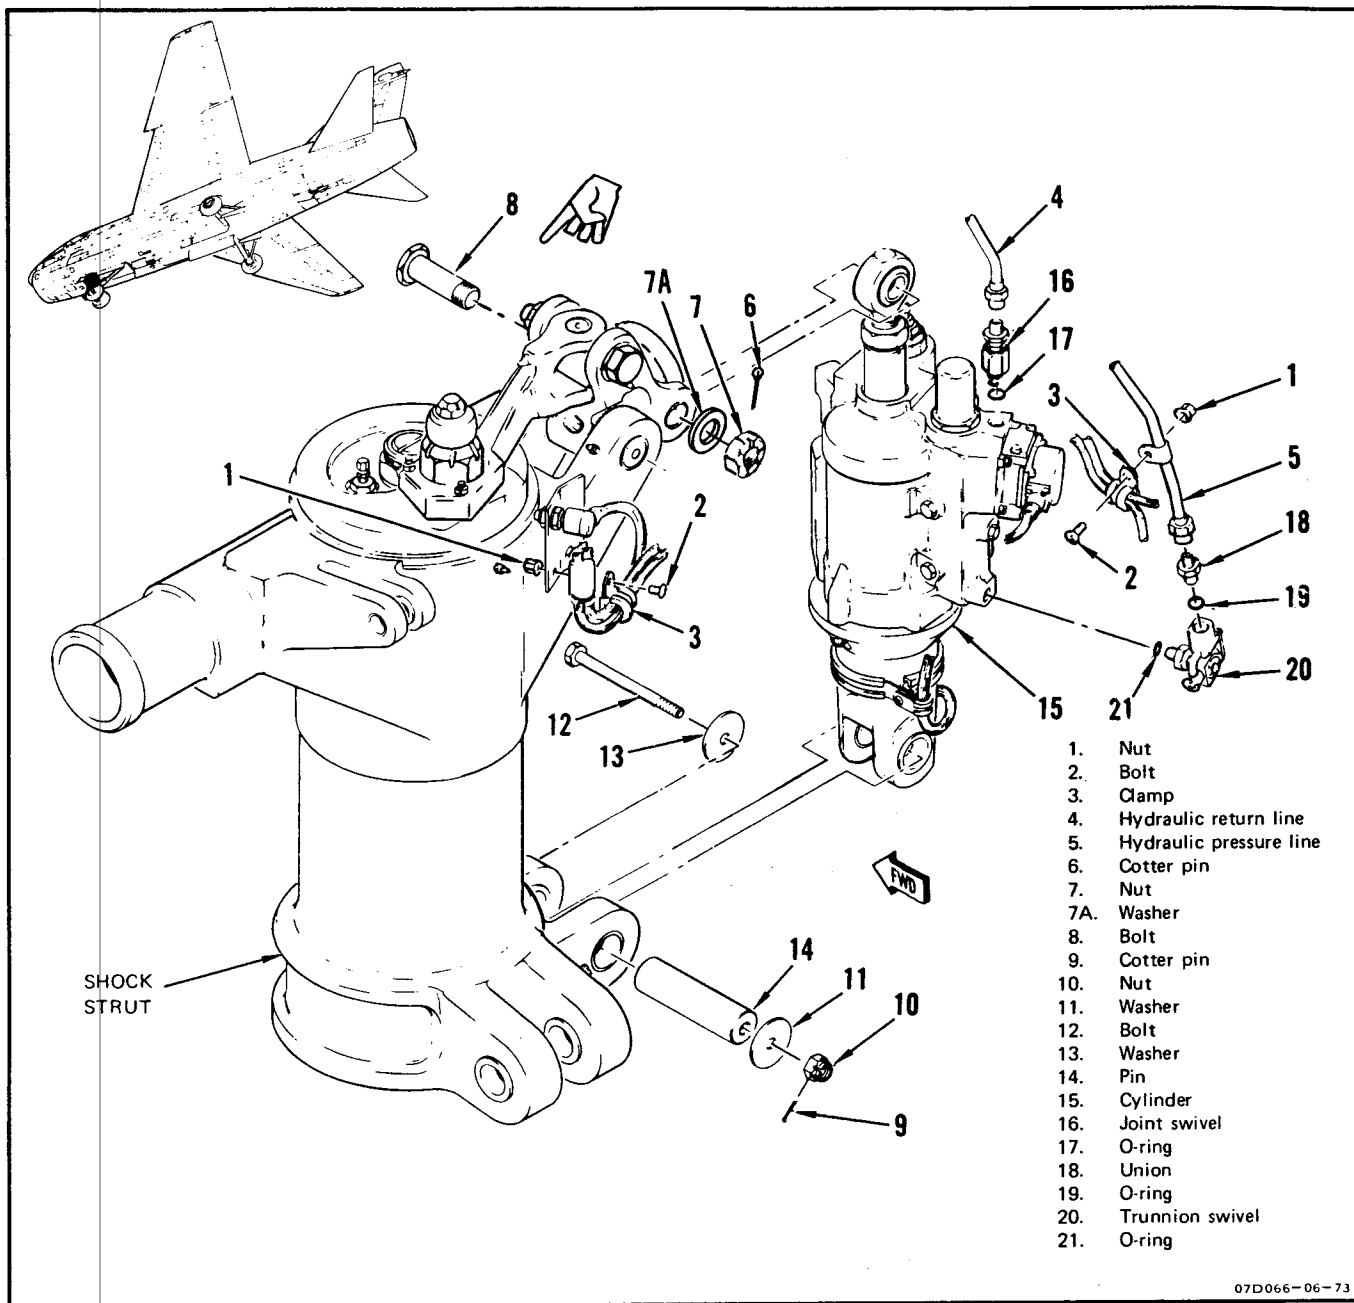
Nose Gear Steering Actuator Removal and Installation
